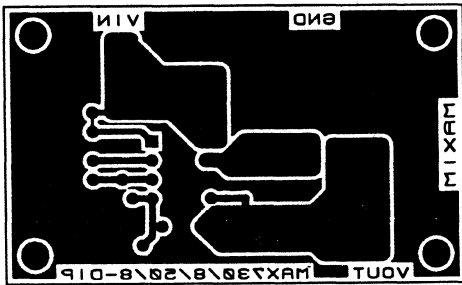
DIP PC Layout, Solder Side (1X Scale)
